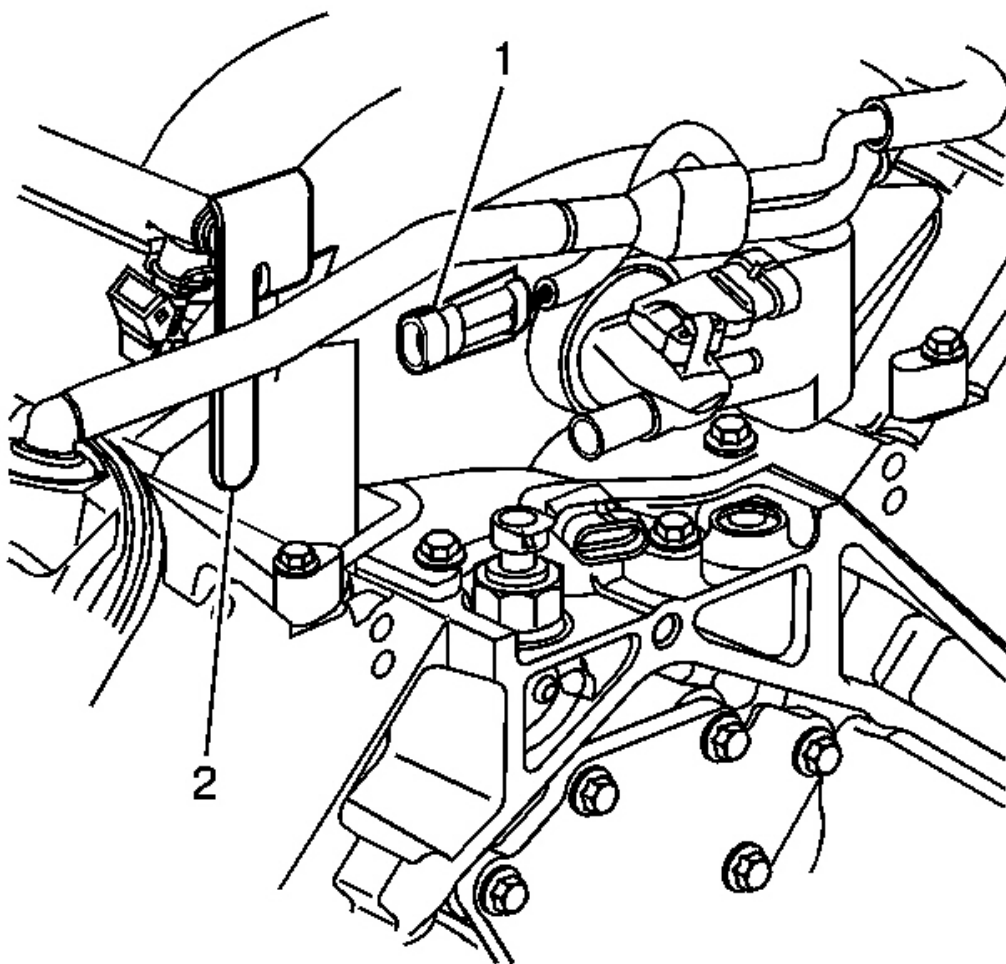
Knock Sensor Wire Harness Clip & Fuel Rail Stop Bracket
